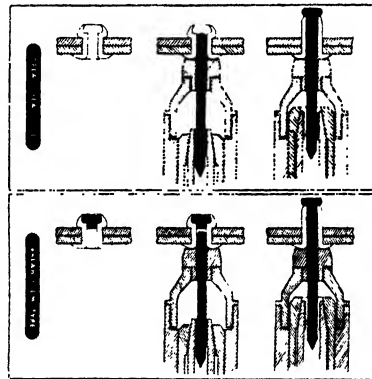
Riveting with "Pop" rivets of the break-head type (above) and break-stem type (below).
